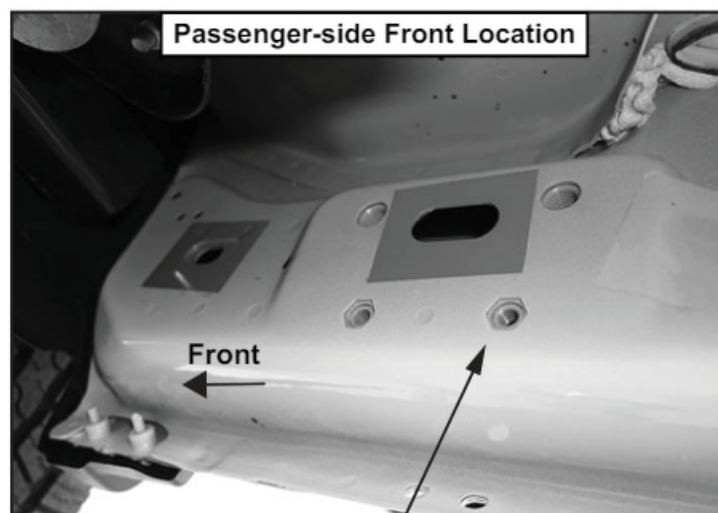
Attach Bracket to Bolt on Bolt Plate
